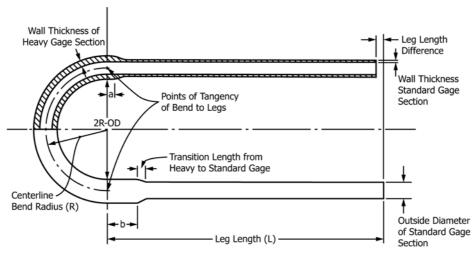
Centering of U-Bend in Heavy Gage Section of Tube
